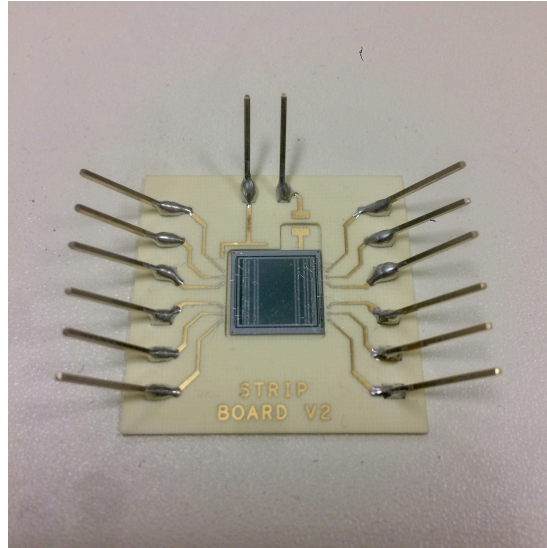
PCB with wire-bonded ATLAS17LS mini 1×1 cm.
